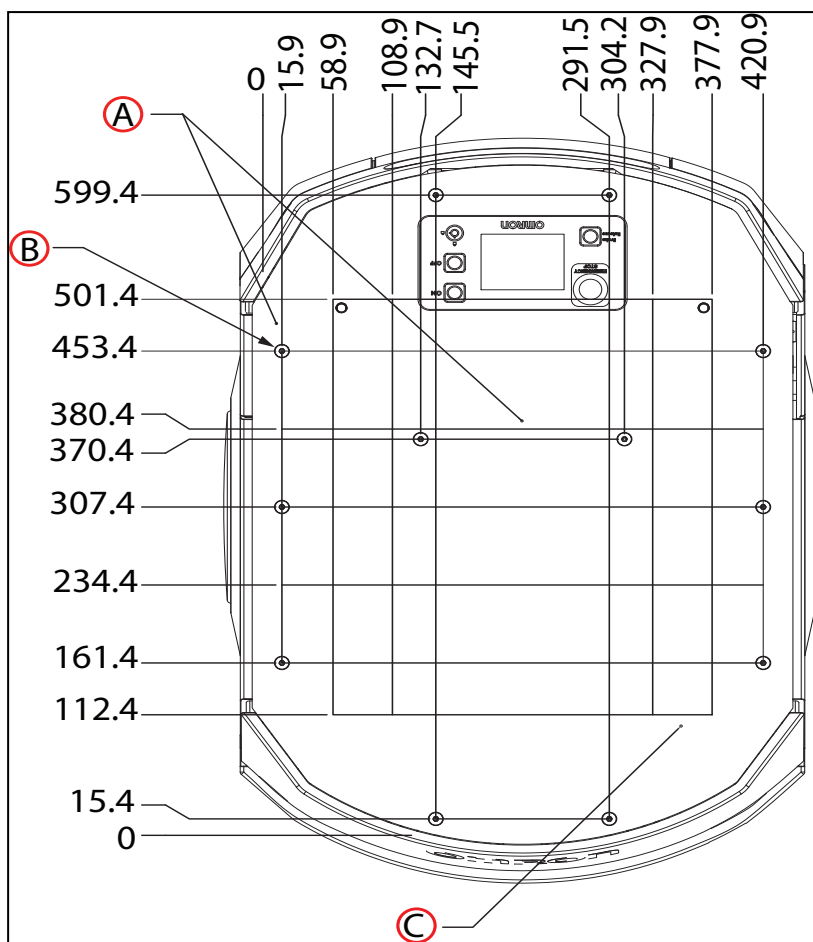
PlatformDeck Dimensions, with M6-threaded Holes (units are mm)
